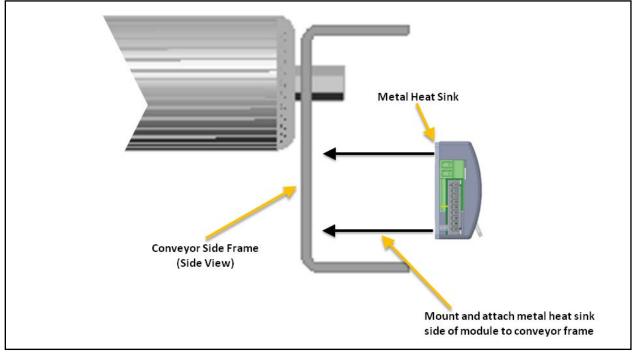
HEAT SINK ATTACHMENT TO FRAME
